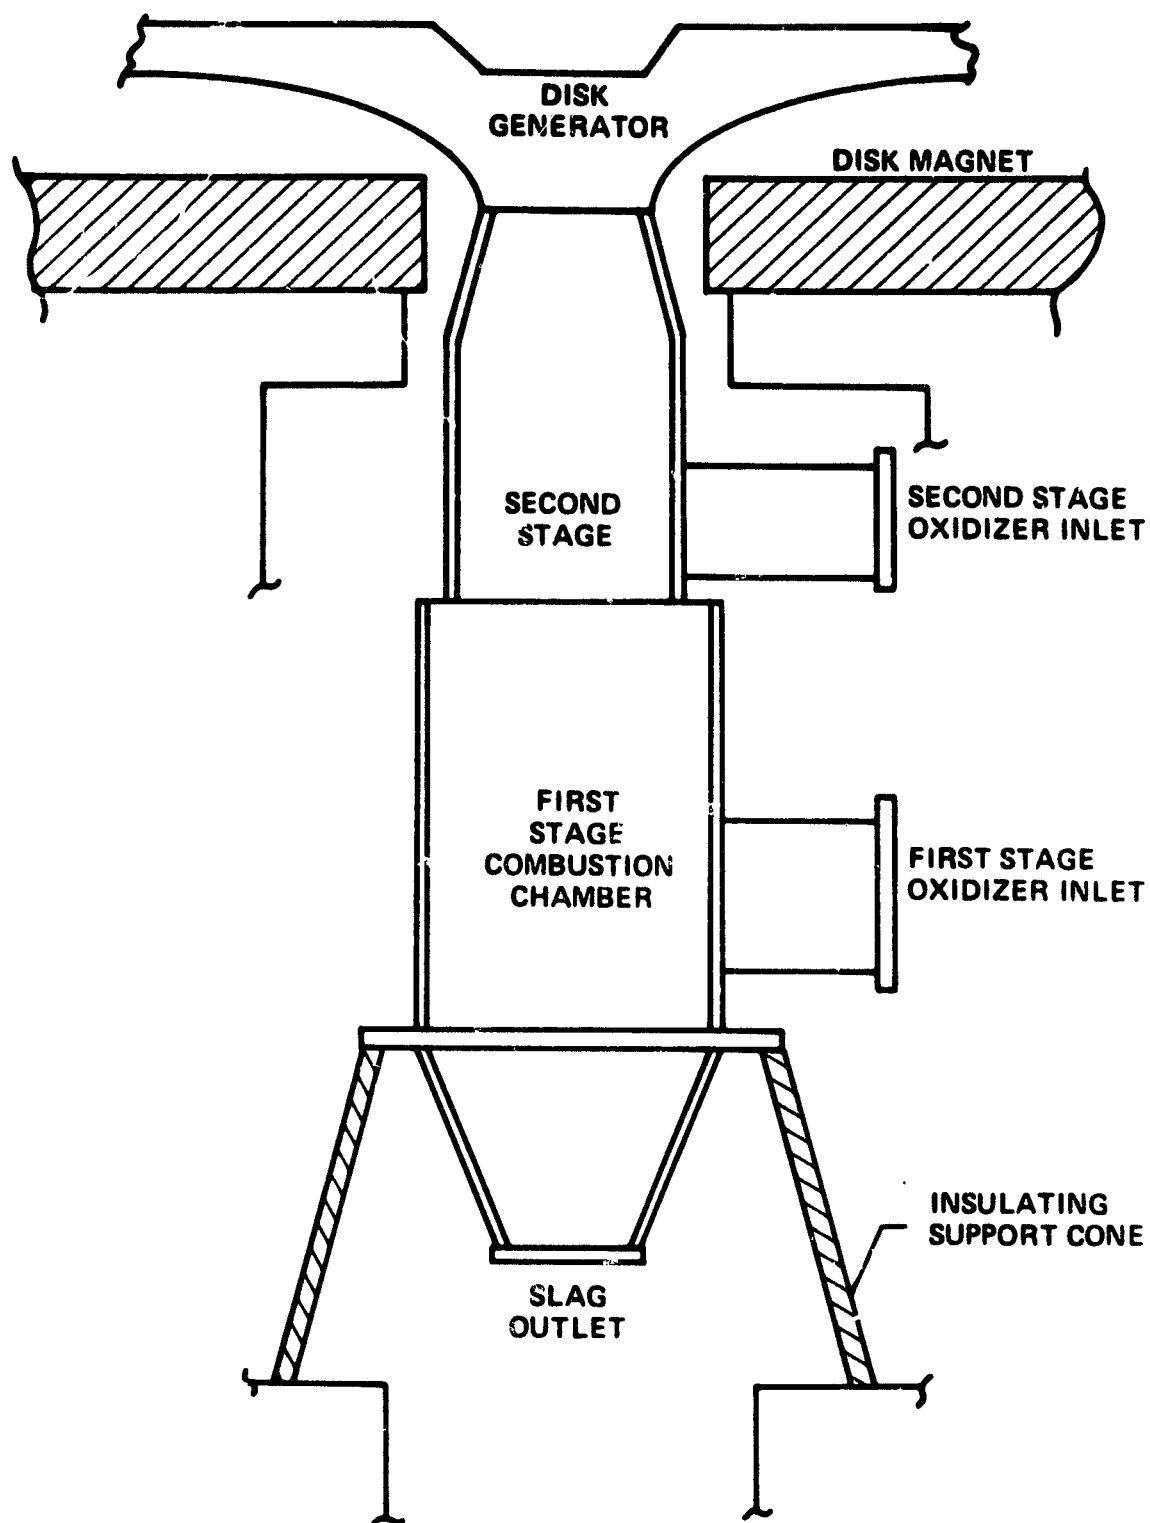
Disk Combustor Outline Drawing (Elevation)
